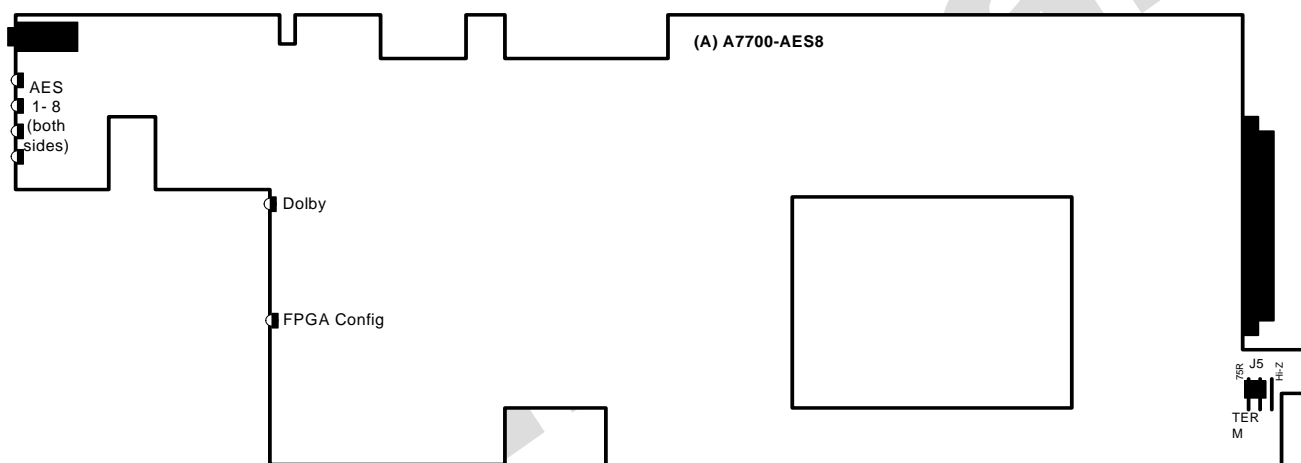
Location of Jumpers/LEDs – Rev. A Sub Board
